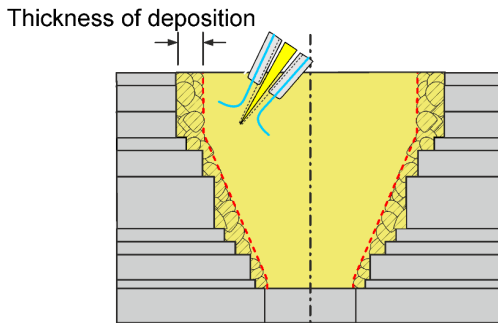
Cold forging die manufactured by hybrid laminated tooling method
